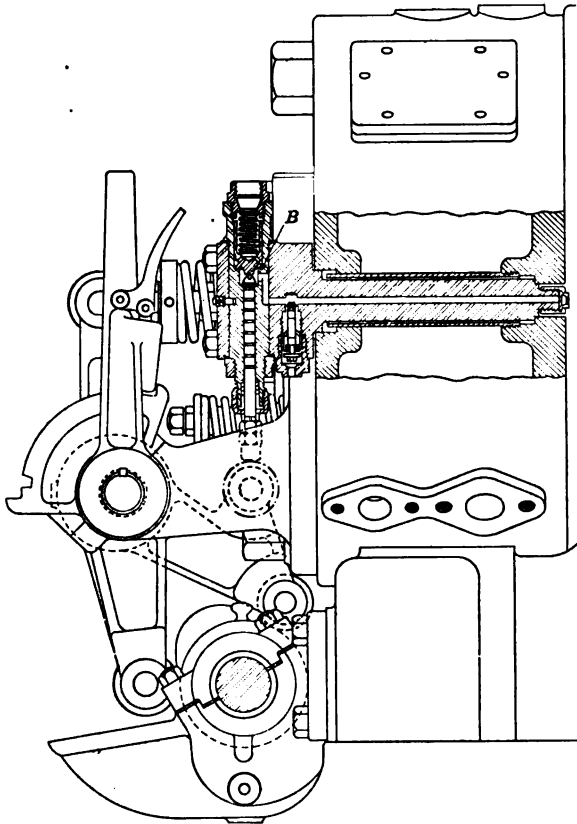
National Transit 1918 design Diesel fuel valve and cam assembly.
